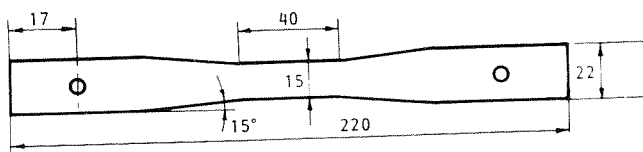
Specimen used in the tensile and fatigue tests: 0°phenolic composite. Dimensions: mm.
